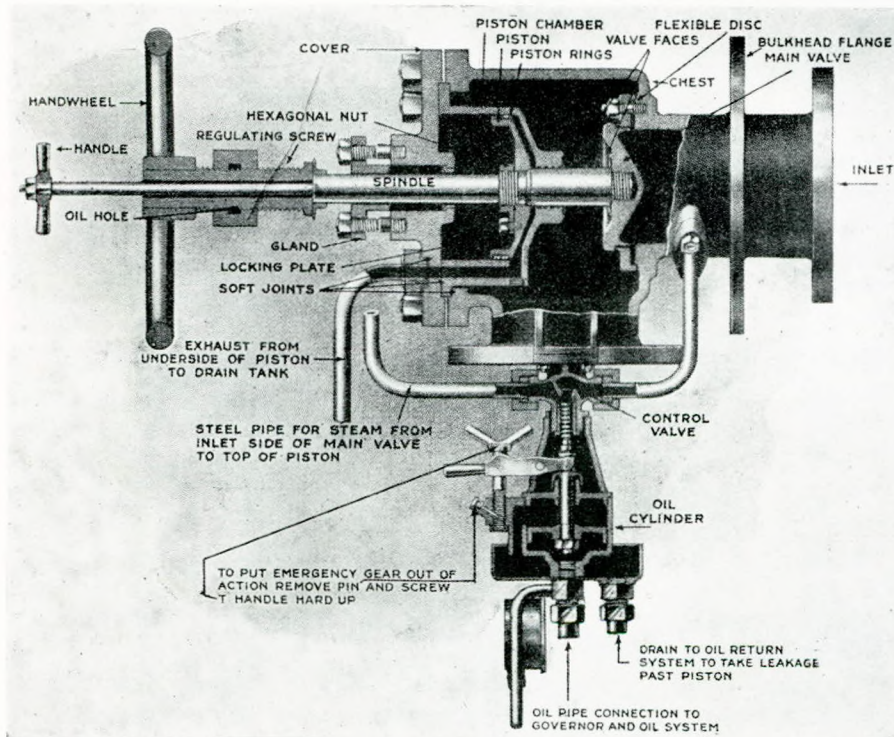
Cockburn-MacNicoll bulkhead emergency valve.
